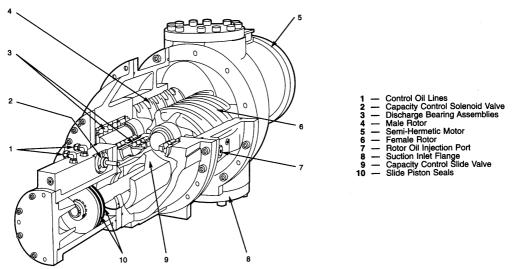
Illustration of a twin-screw compressor design (courtesy of Carrier Corporation).
